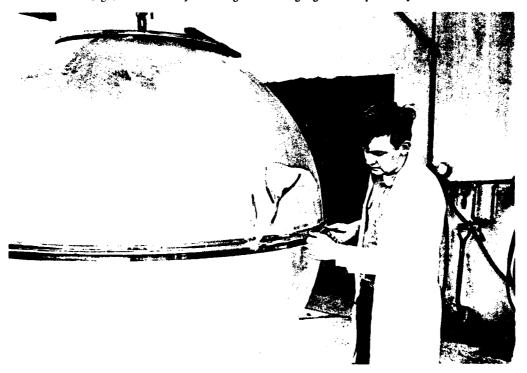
Taped equatorial joint ready for pouring of casting mix.
